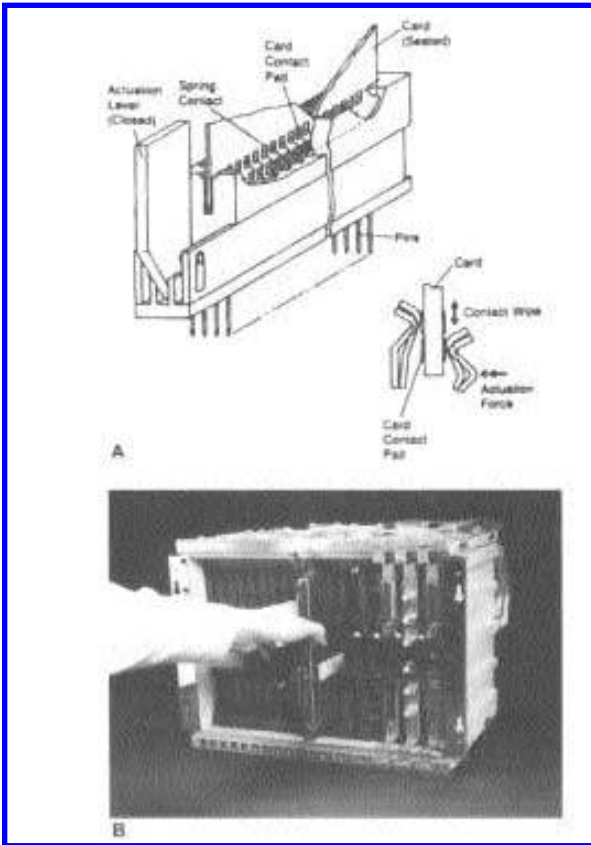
A card edge connector system is shown in “A” “B” shows a card assembly being plugged into a cage, which is then mounted in a machine frame or rack.
